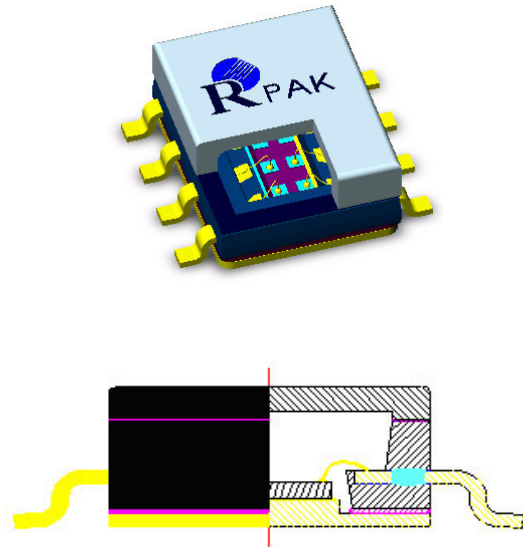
Representative R-Pak package. Top; cutaway of cover illustrating the internal cavity with a die on metal package base. Bottom; end view of package with cutaway on right showing cross section of package.
